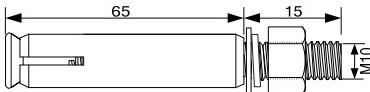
Dimensions of Expansion Bolt Set for Concrete Wall (unit: mm)
